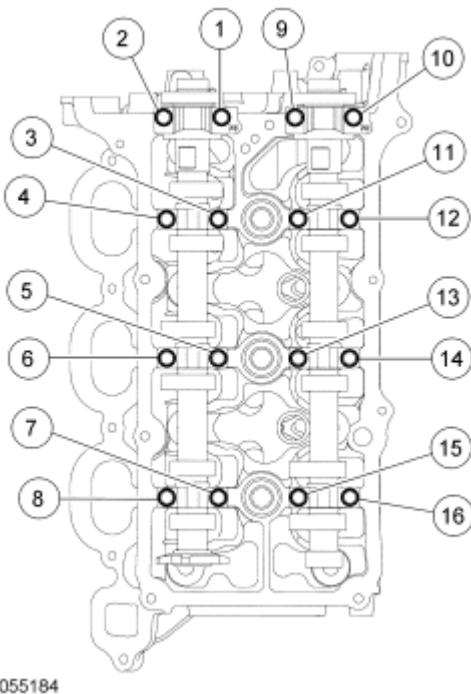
Installing Camshaft Caps & Bolts In Sequence
